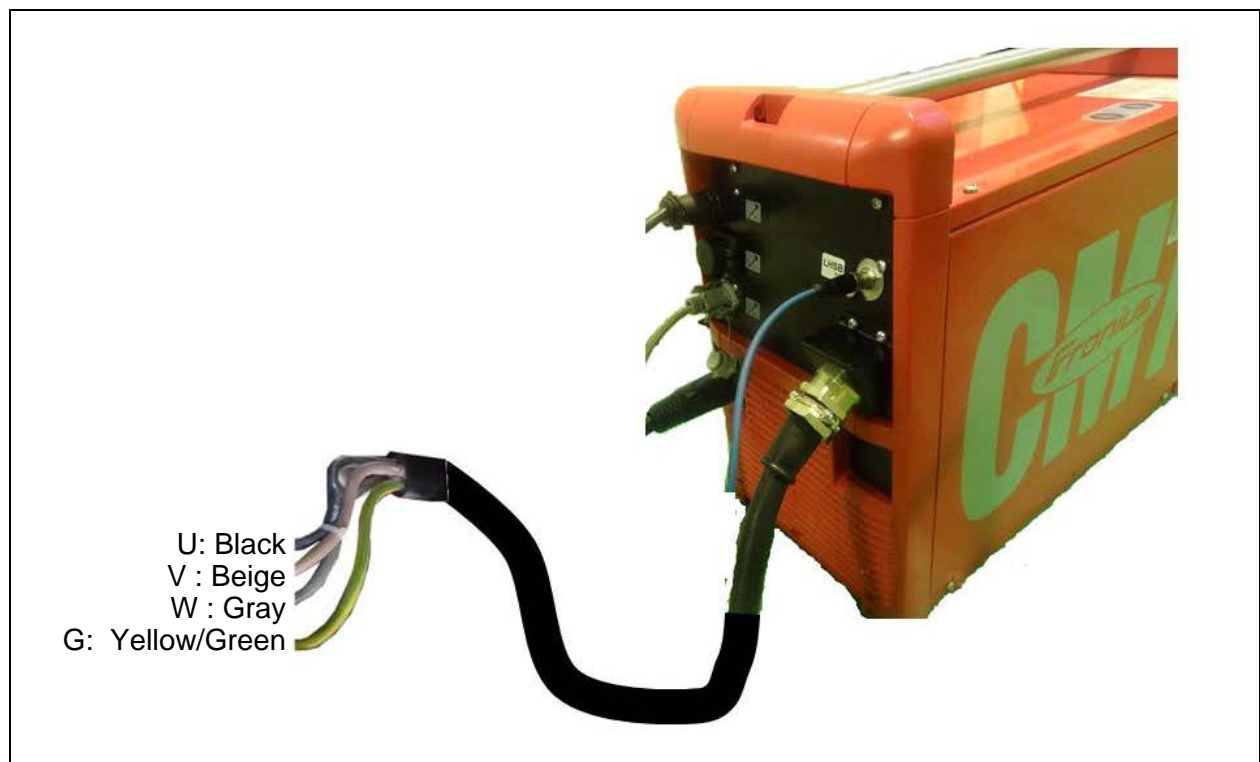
Connection of Input Power Supply of the Welding power supply
